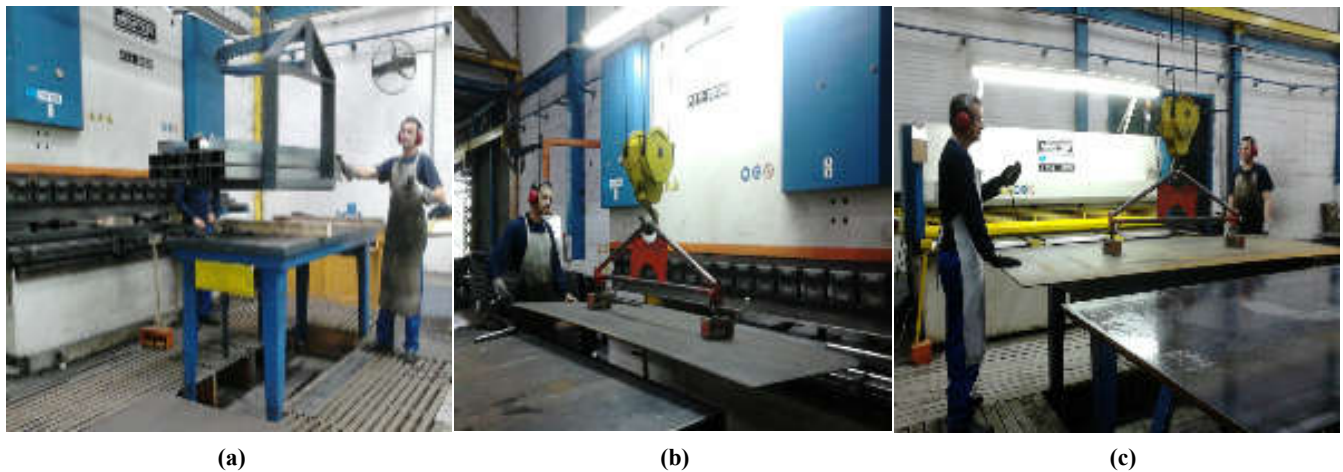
Cutting sector and bending: a - machine setup with the crane, b - bending heavy parts with the help of the crane, c - cutting guillotine heavy plates with the help of the crane
